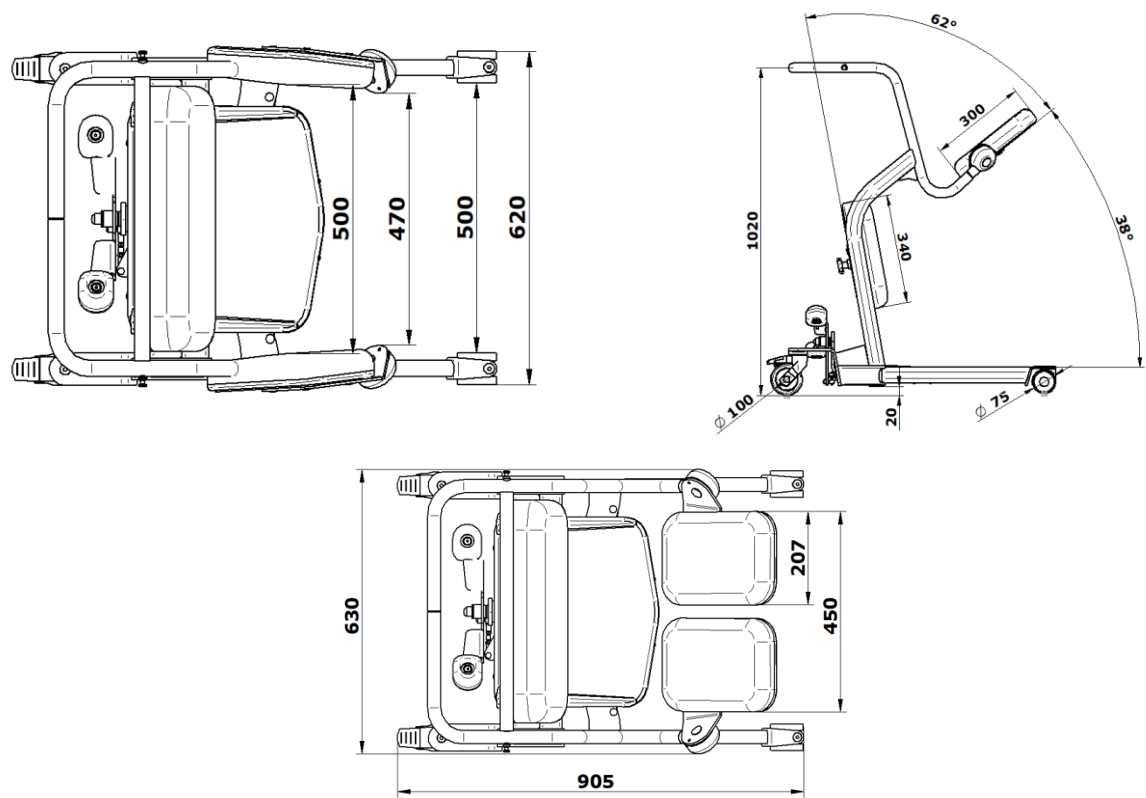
Mobi Pro Flexi II mobile patient lift dimensions (dimensions in mm)
